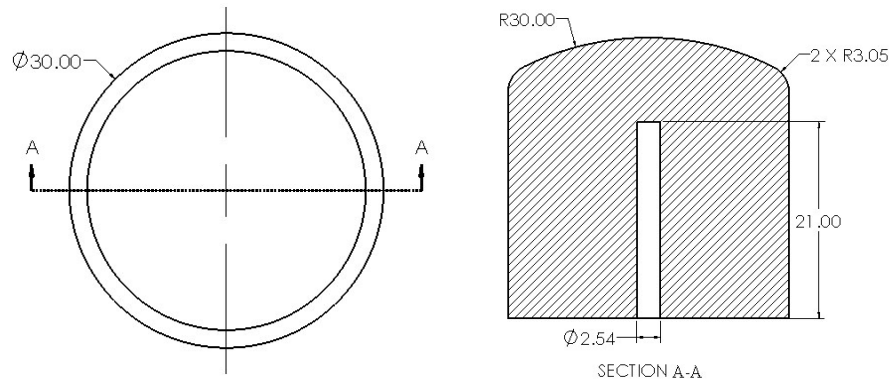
Overall dimensions of OTB specimens (Left) Top view (Right) Side view.
